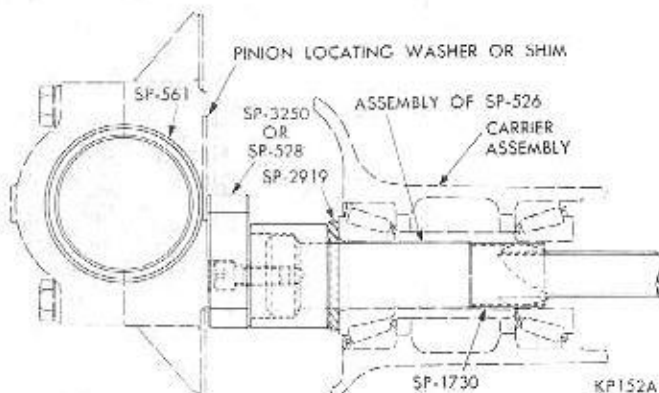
Pinion Preload with Spacer (8-3/4" Ring Gear)
